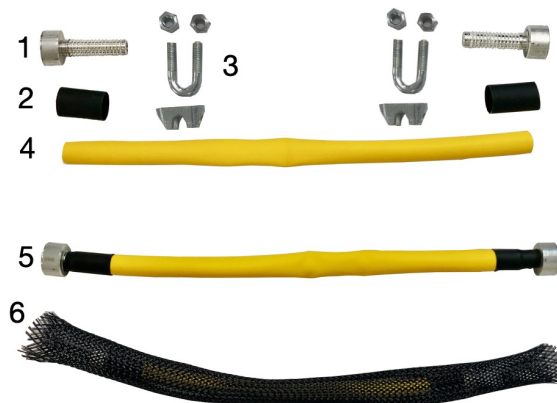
Parts to make a PAM: (1) designed end-part (2) heat shrink (3) U-bolt, (4) balloon, (5) balloon attached to the endings, and (6) the outer shell (cable sleeve) wrapped around the balloon and its endings.
